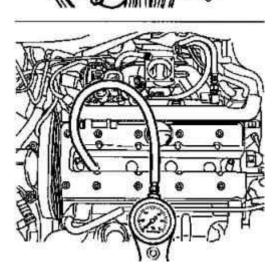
Install the crankshaft position at top dead center (TDC), piston cylinder number 1 and the connection tester
